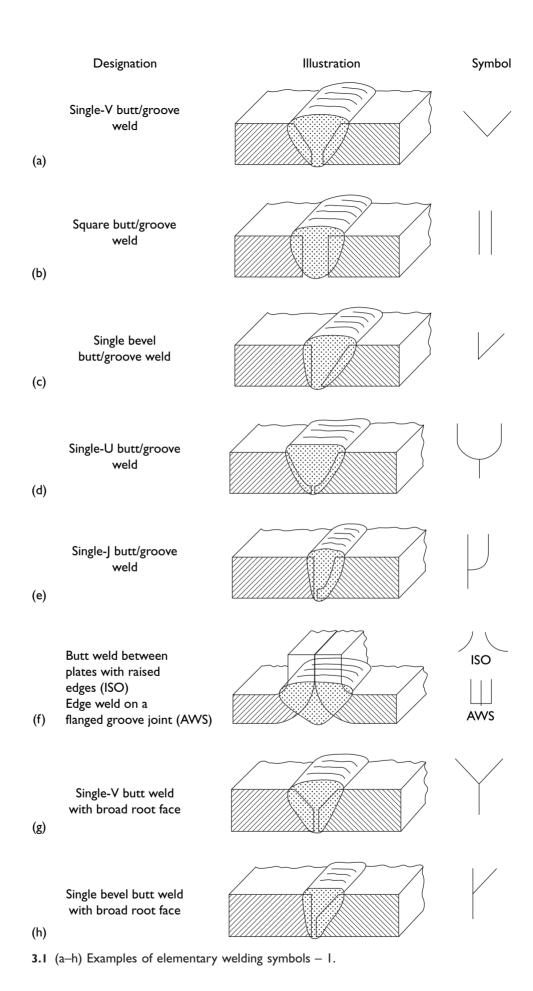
(d) illustrates a single-U butt/groove weld, which is used to restrict the quantity of weld metal required in sections greater than 12 mm thick.
